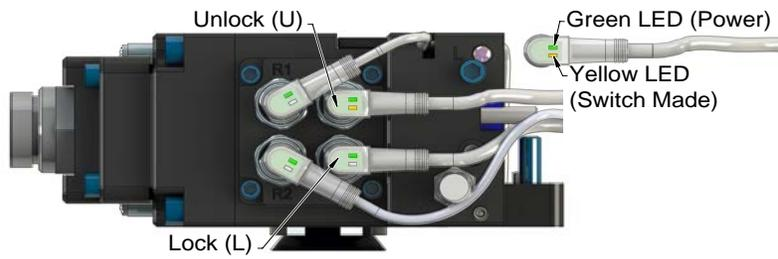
Lock and Unlock Sensor Assemblies (L2/U2) Cable Replacement
